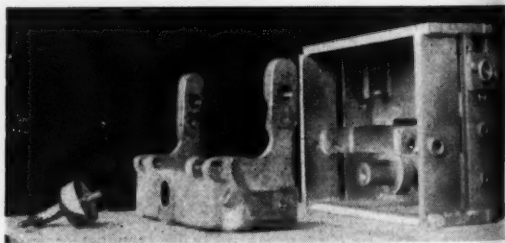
Lift Truck Head Casting and Welded Jig in which It is Drilled
